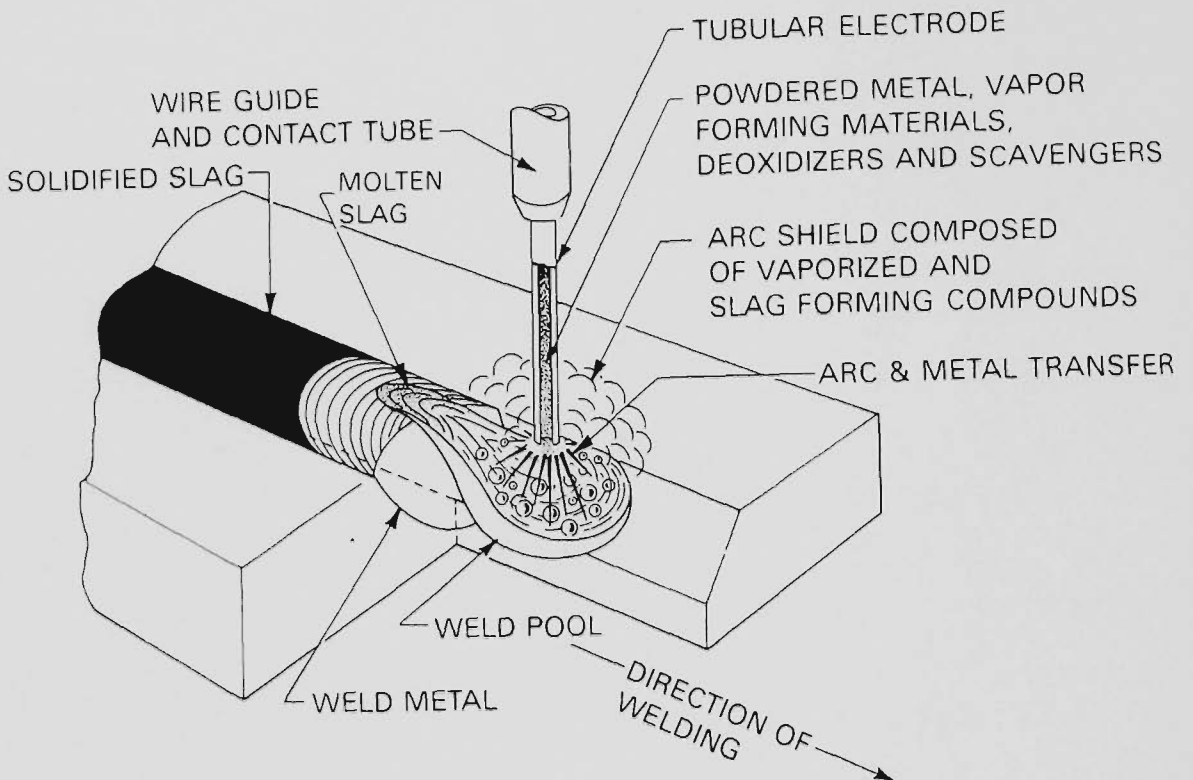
Principle of the Self-Shielded Flux Cored Arc Welding (FCAW) process
